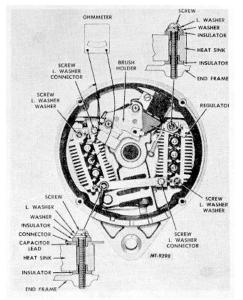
Parts StackUp and Ohmmeter Check (Stator and Diode Trio Removed)
